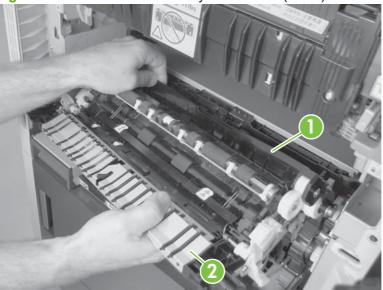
Remove the secondary transfer unit (7 of 9)
